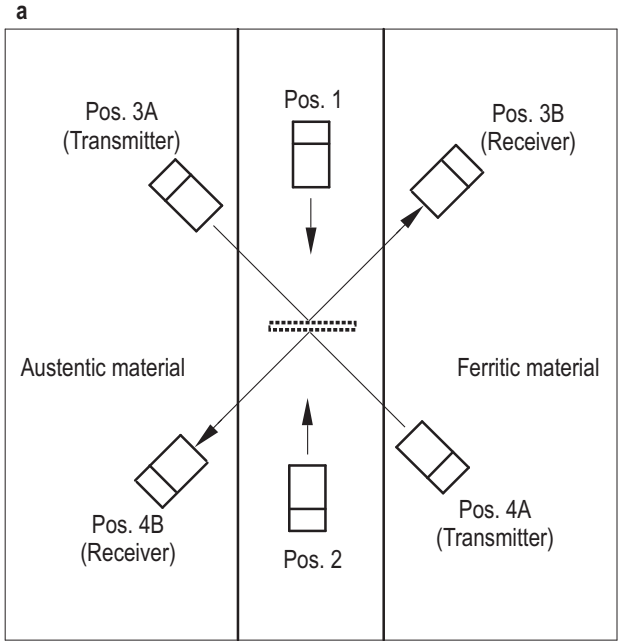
Location of notches and sound beam directions for the test for longitudinal defects of welded joints between ferritic and austenitic steels
